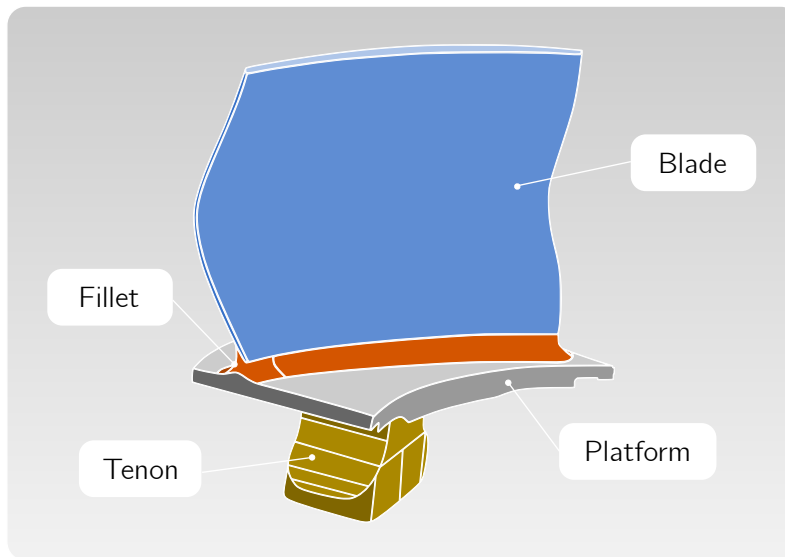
Stylised example of a High-Pressure compressor blade assembly.
